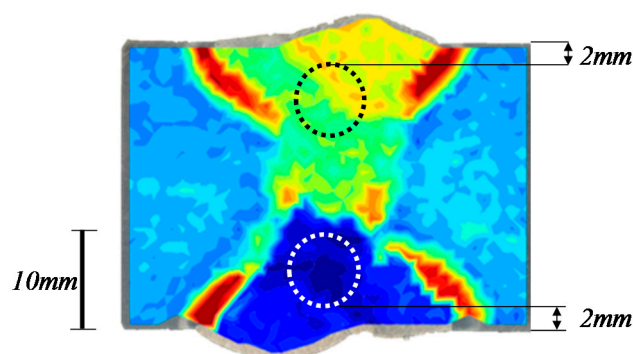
The AWMTT specimens were extracted at a 2mm distance from the plate surfaces in the OM and UM regions. They were extracted such that the entire cross section lies within the weld without intersecting the HAZ or the interface between OM and UM weld metal.
